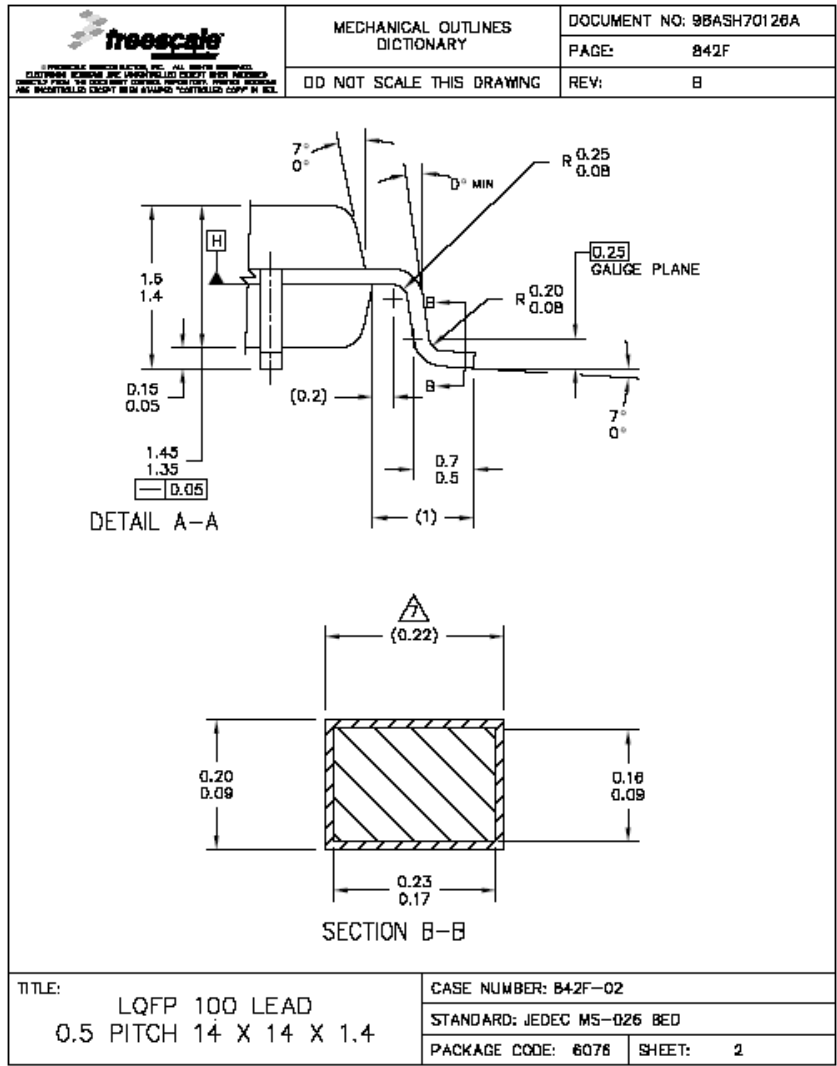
100 LQFP package mechanical drawing (2 of 4)
